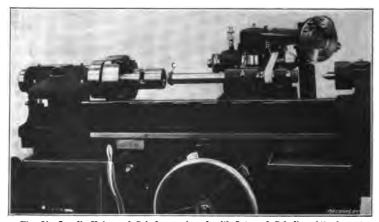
Landis Universal Grinder equipped with Internal Grinding Attachment
